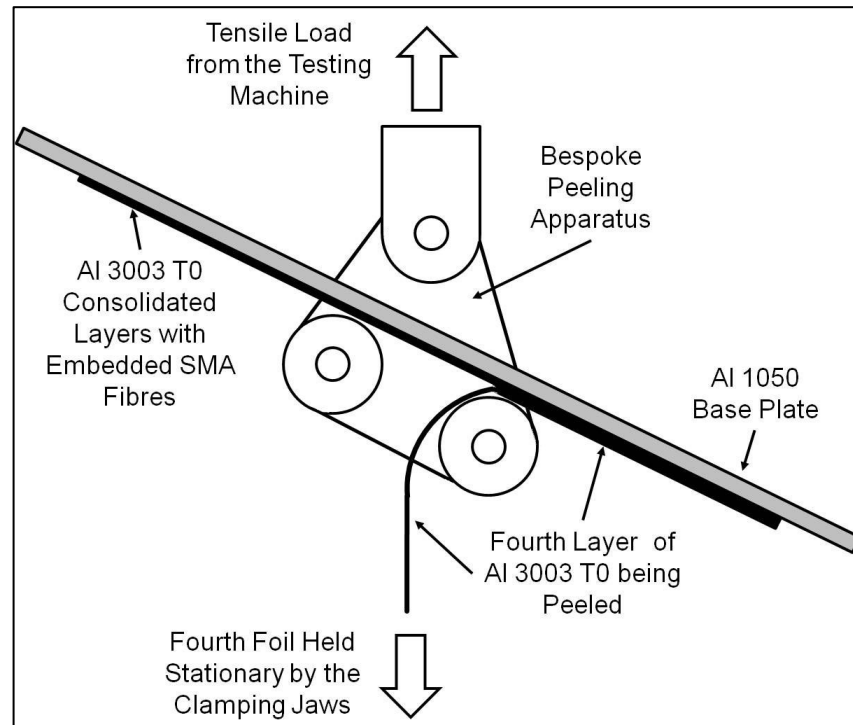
Schematic of the sample mounting technique within the bespoke peel testing fixture
